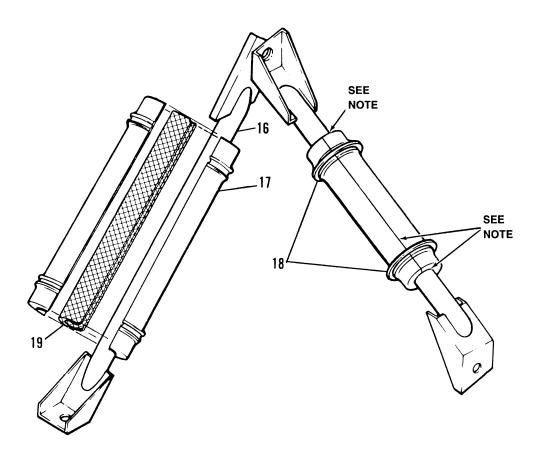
Installation of engine mounts (Sheet 1 of 2)
